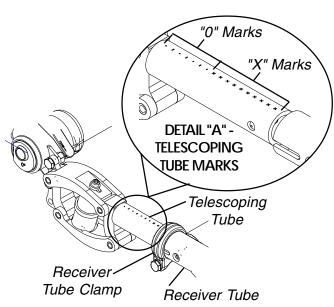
ADJUSTING WHEELBASE LENGTH (ADJUSTING CENTER OF GRAVITY)
